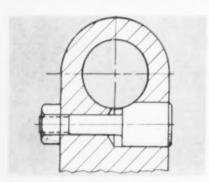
In this design, the clamping portion of the bolt is larger than in the designs illustrated in Figures 19 and 20.
